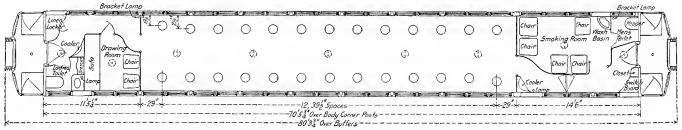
Floor Plan of Long Island Steel Parlor Car. Builder, American Car & Foundry Company.
